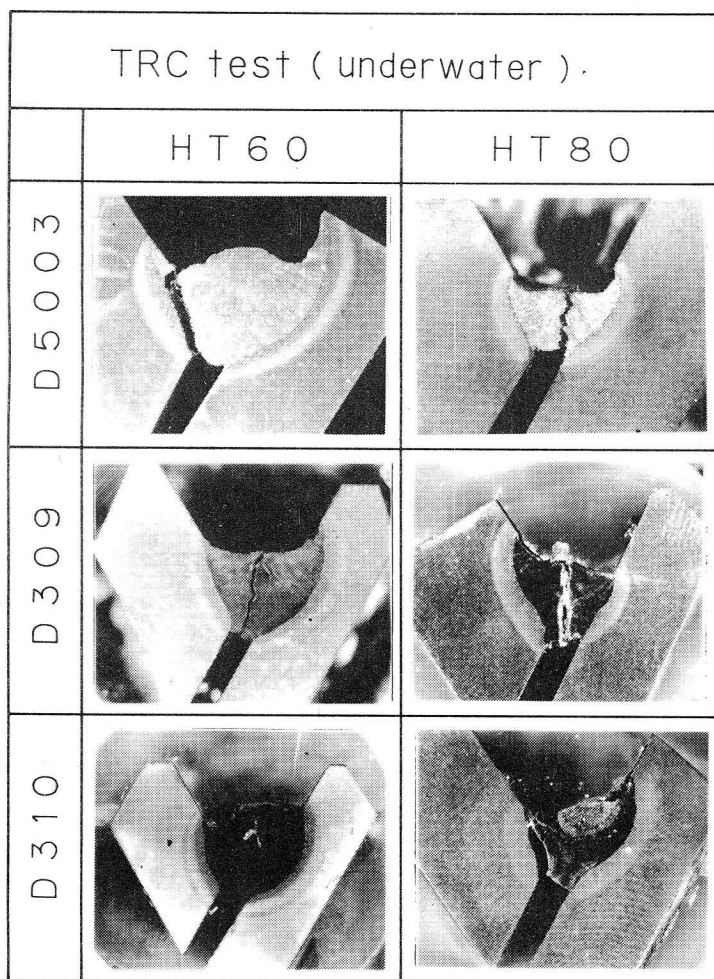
Typical root cracks in the weld of TRC specimen
